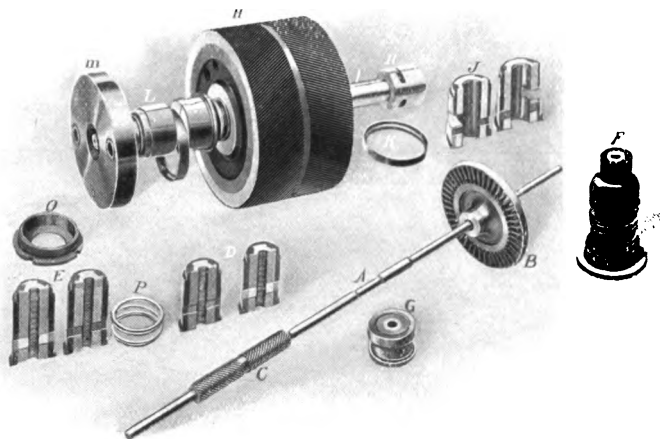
Working Parts of the De Laval Steam Turbine.
